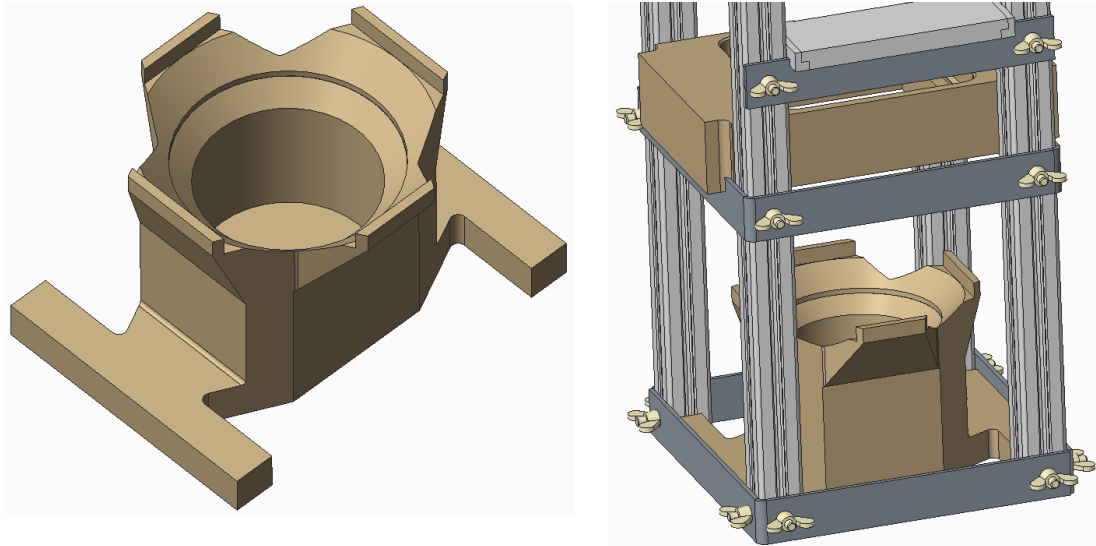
The second concept for the transition holder. The placement of the holder inside the fixture frame can be seen to the right.
